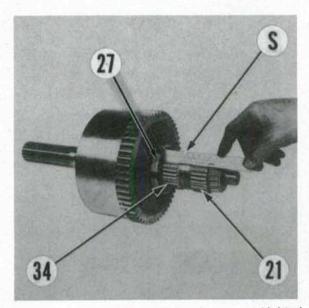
When assembling clutch unit, use a straightedge (S) to align splines on spacer (21) and clutch actuating housing (34) as nut (27) is tightened.
